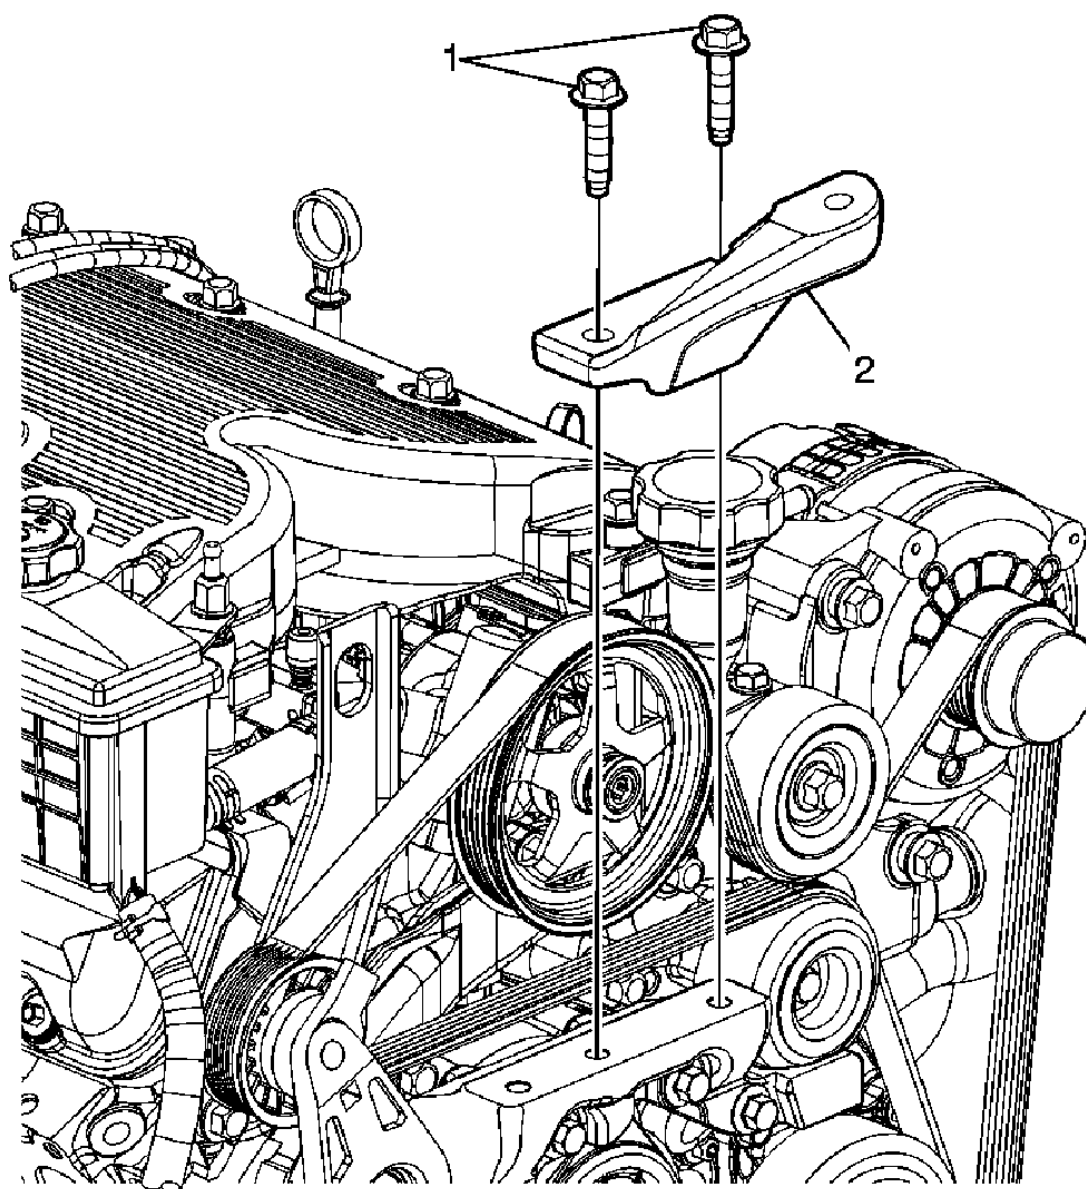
Identifying Engine Mount Strut Bracket (Strut Side)
